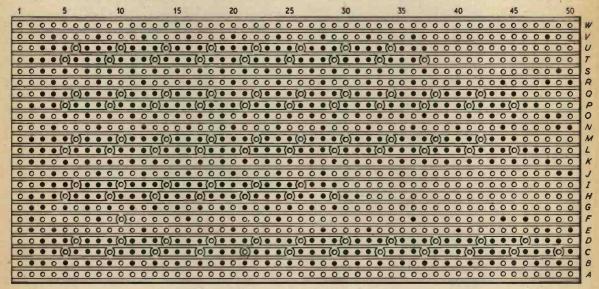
Underside view of Board I showing copper strip breaks and connections
